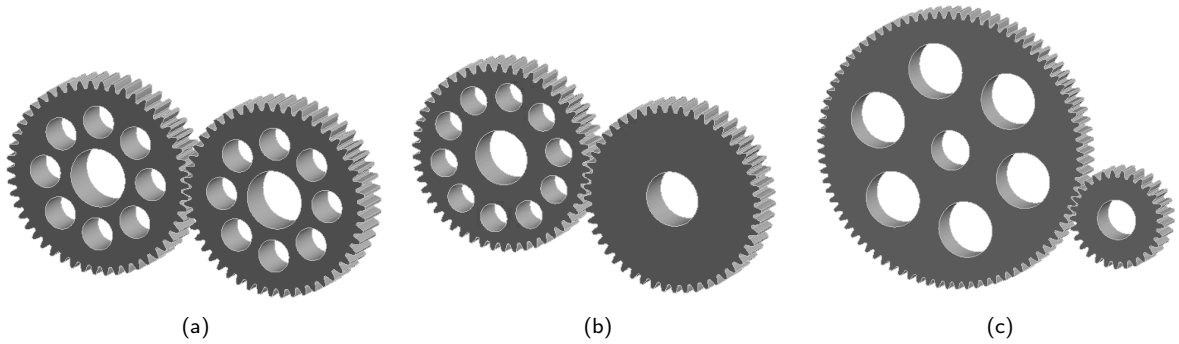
Test case 1: (a) reverse gear pair with 8 holes on driving and driven gears. Test case 2: (b) reverse gear pair with 10 holes closer to the teeth on the driven gear only. Test case 3: (c) reducer gear pair with 6 holes.
